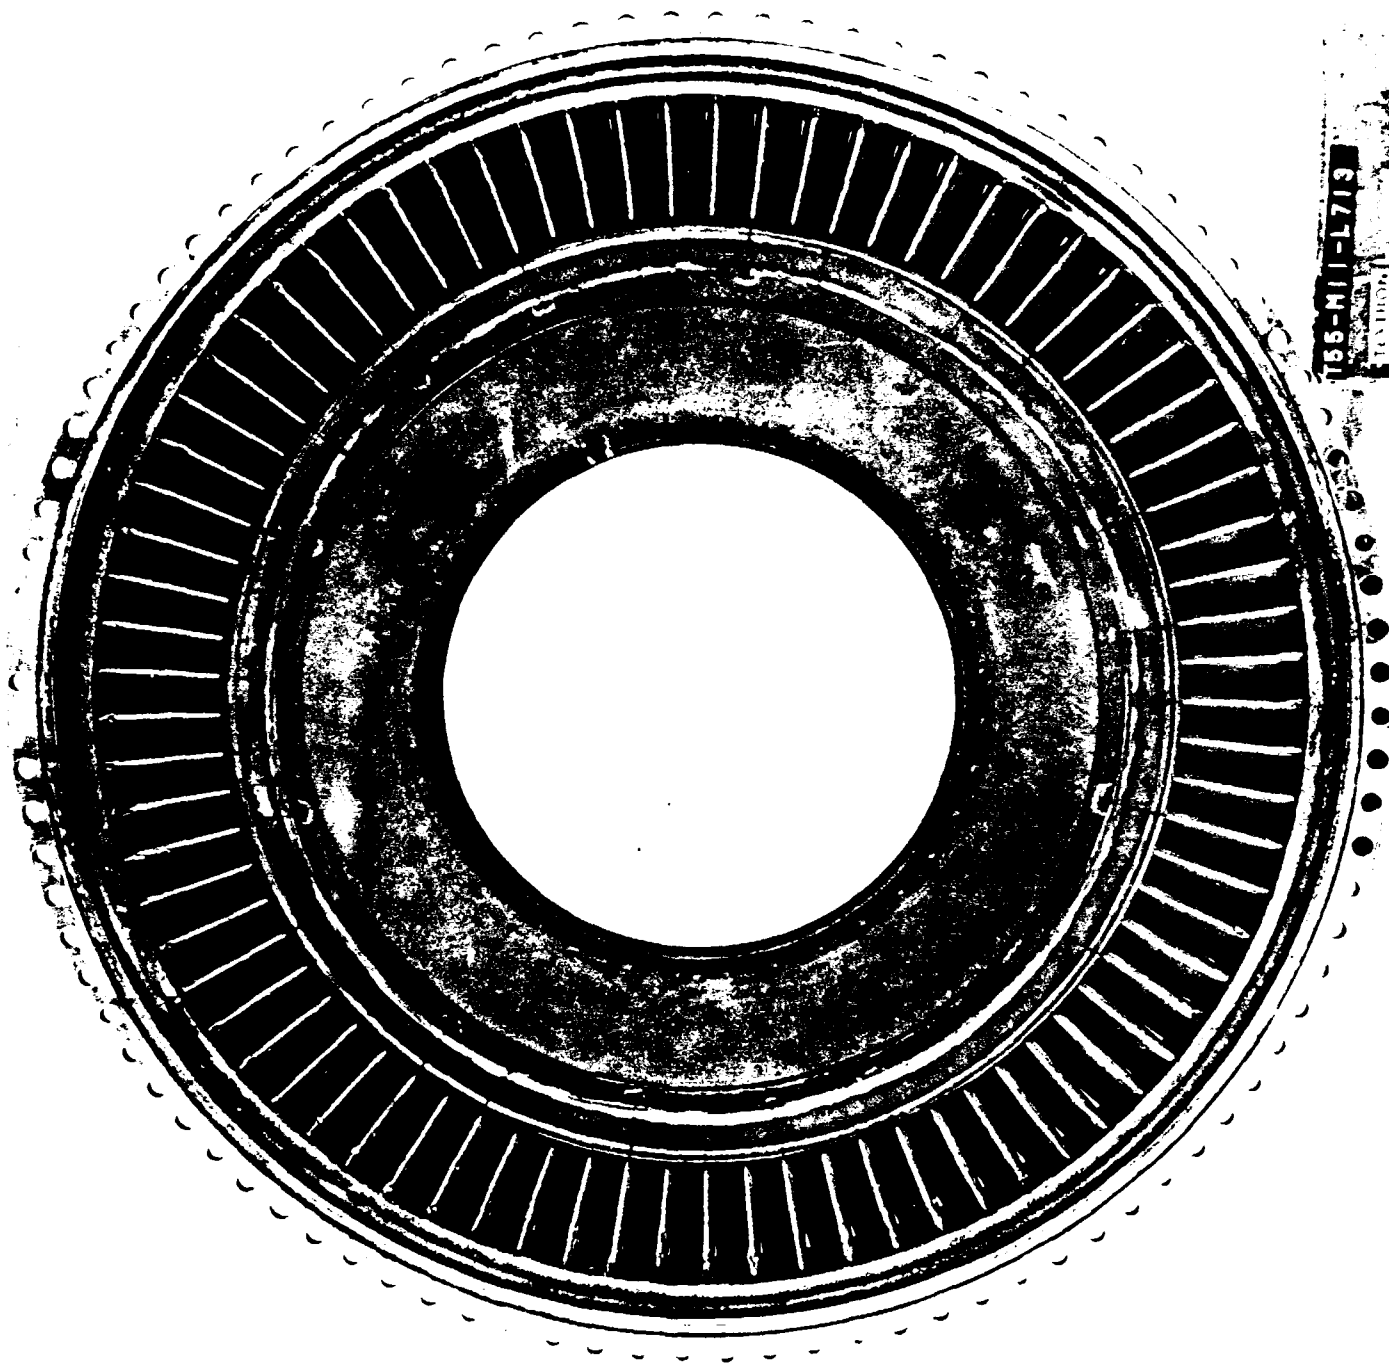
A Second Nozzle, Front, Inner and Outer Shroud
